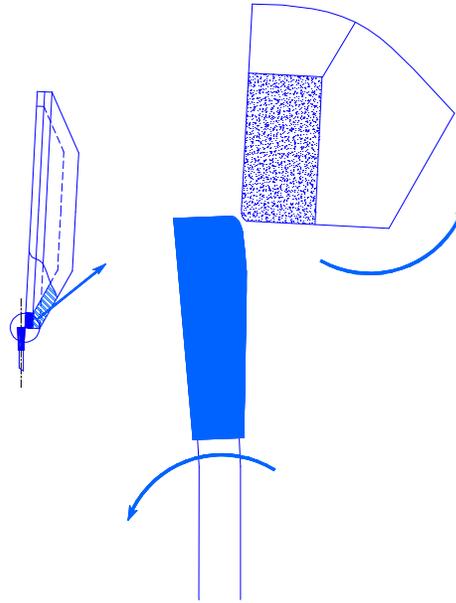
Dubbing (rounding) of the tooth surface due to too much grinding pressure. Either tooth or grinding wheel can bend.
